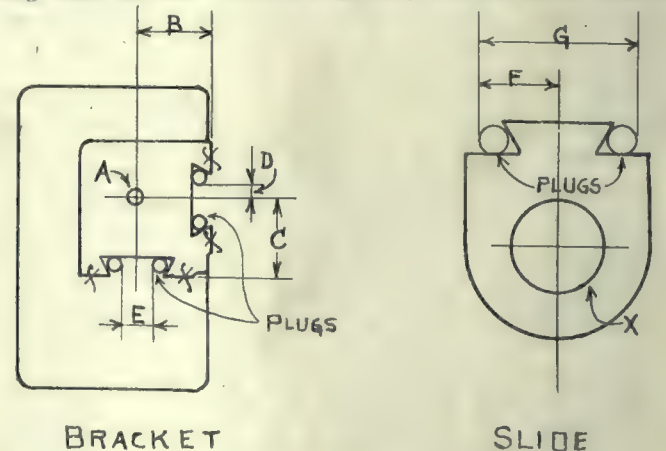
ARRANGEMENT OF PARTS TO BE ACCURATELY ASSEMBLED.
